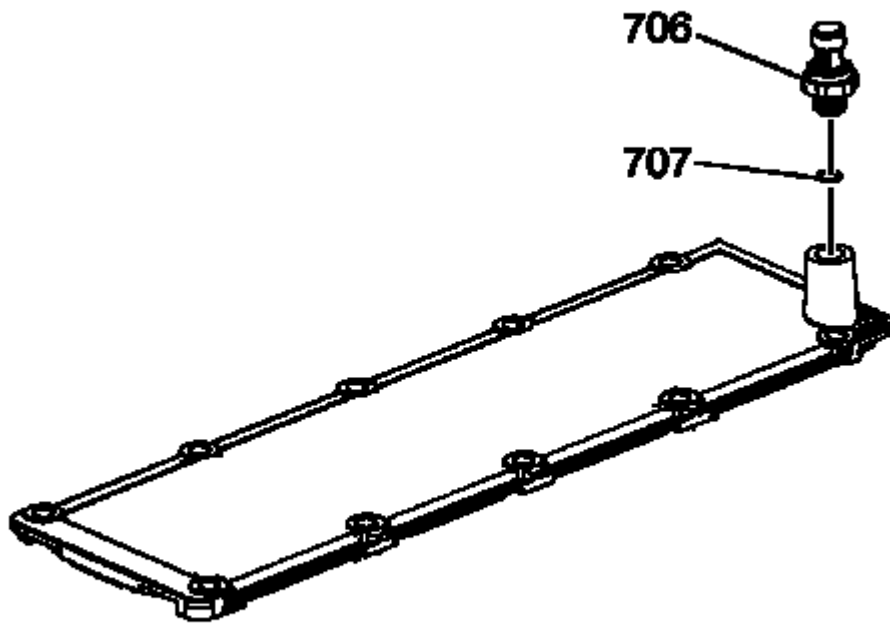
Removing/Installing Oil Pressure Sensor & Washer
